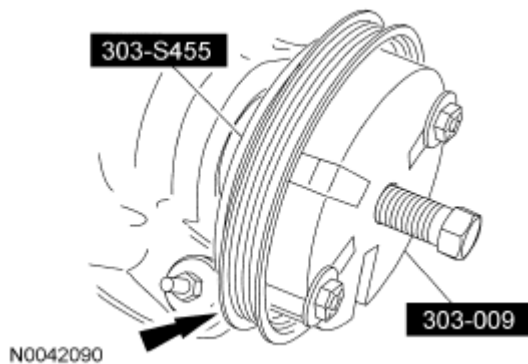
Identifying Special Tools (303-S455 And 303-009) And Coolant Pump Drive Pulley
